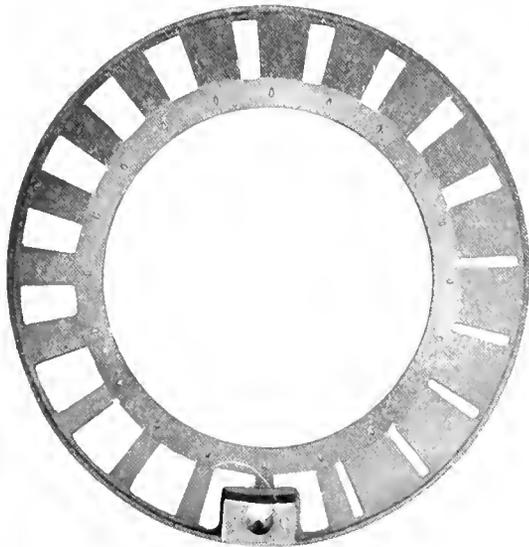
Ring Valve for Regulating Pressure of Extracted Steam
